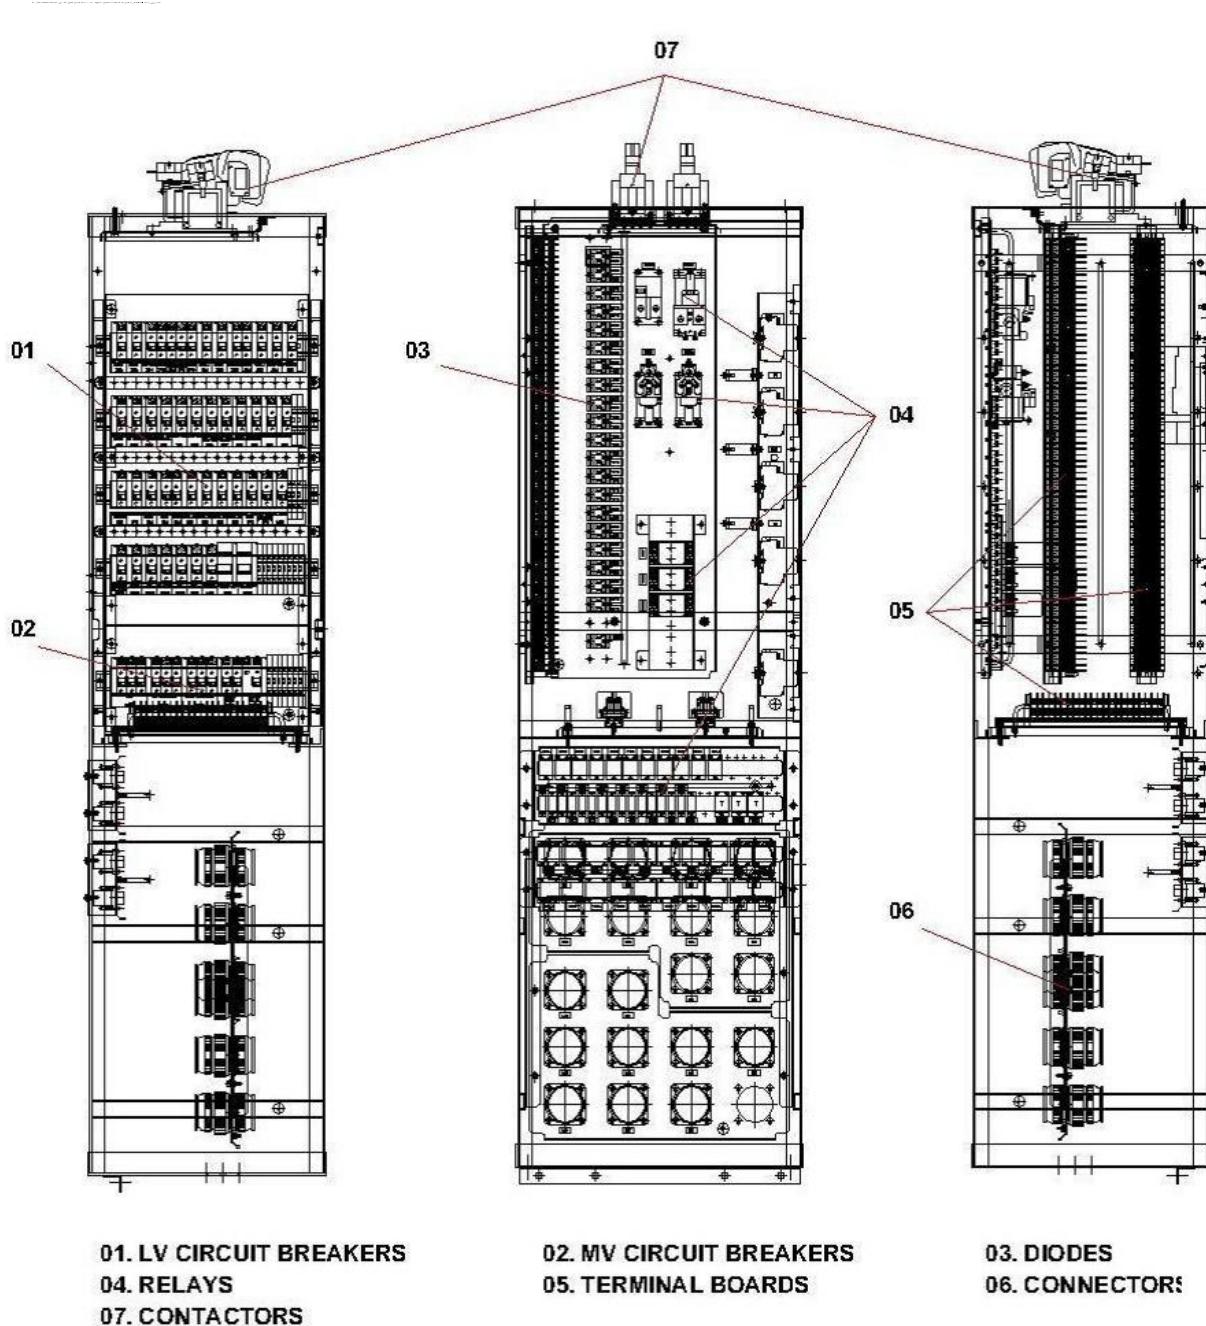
I-02.53 “A” Cab Electric Locker Layout
